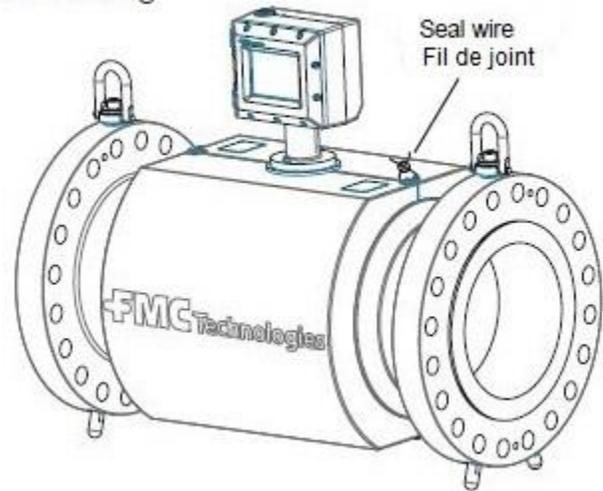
MPU UMC assembly and meter body cover sealing provisions / Dispositions relatives à l'étanchéité de l'ensemble MPU UMC et du couvercle du corps du compteur
